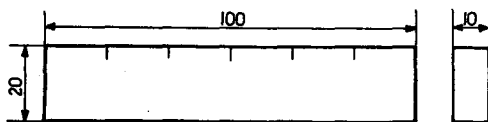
Geometry dimensions of the ultrasonic test specimen (unit : mm).
